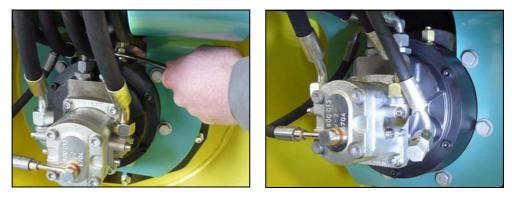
Remove the brake hose and seal it so that it can be pressurized.
